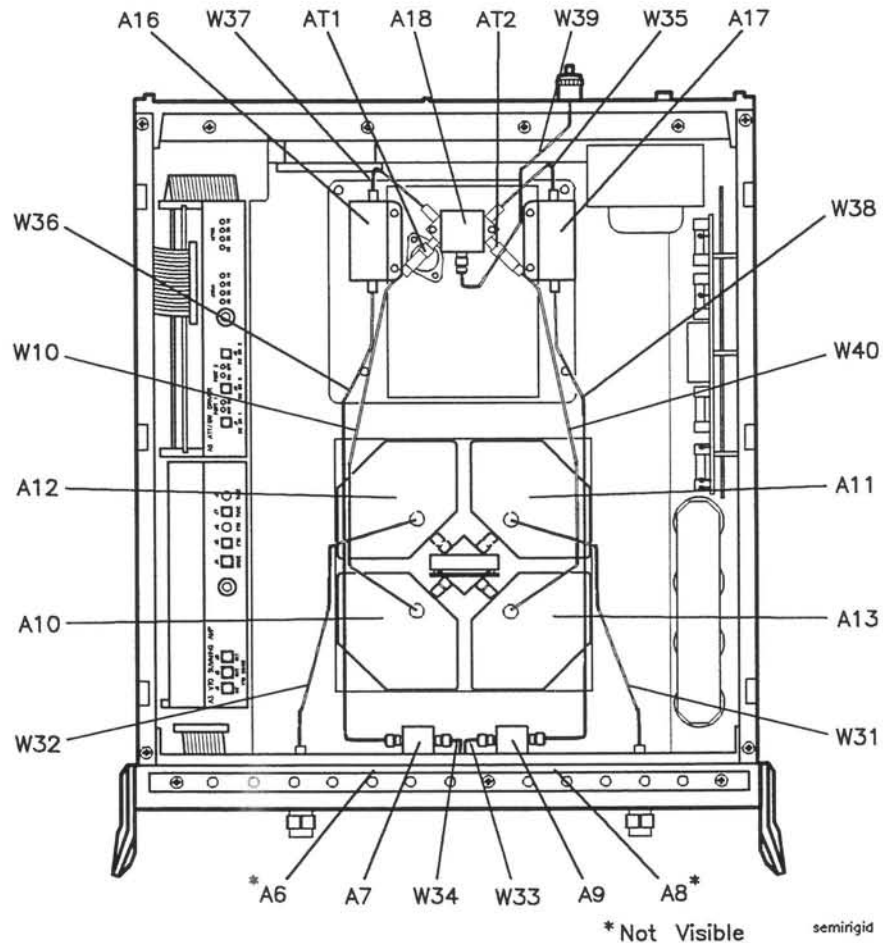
HP 8517B Standard Instrument Semi-Rigid Cable Assemblies
